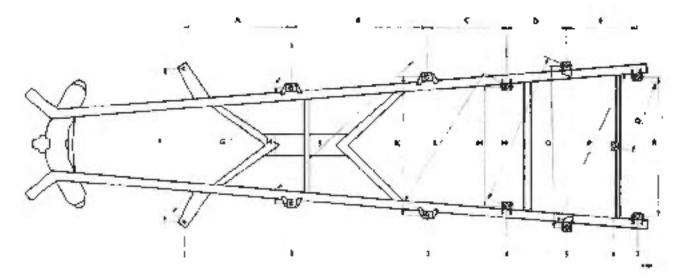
Chassis frame and body checking dimensions for Pleantern V care
